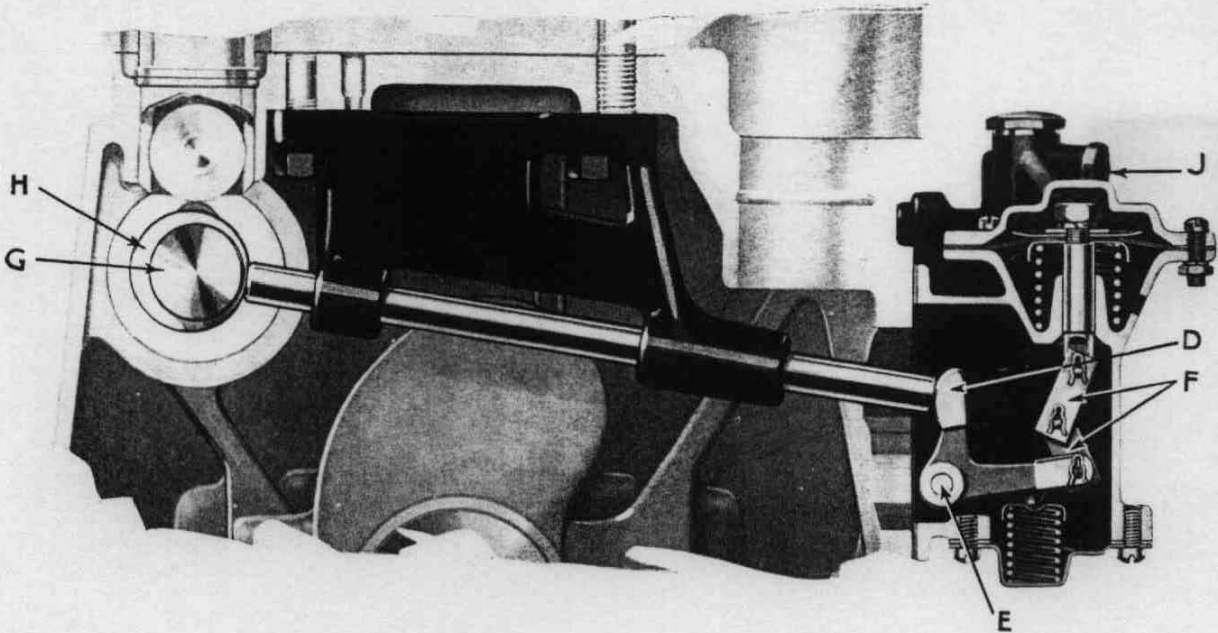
Sectional View of Fuel Pump and Drive from Camshaft.
